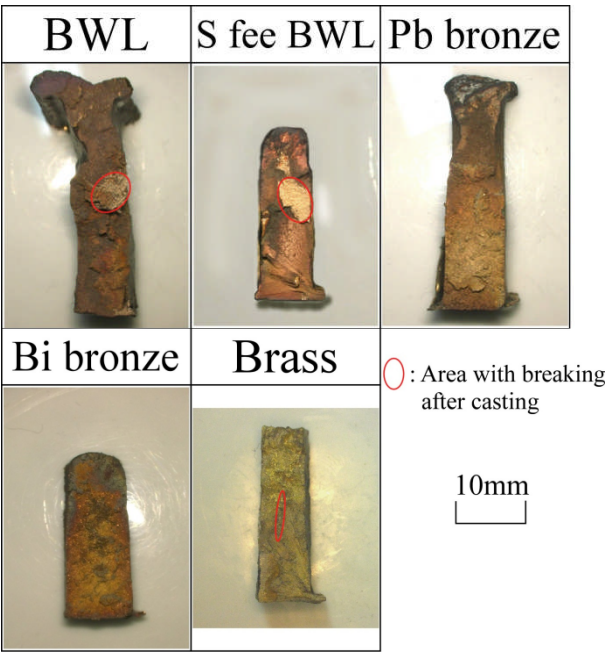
The appearances of the fracture of various Cu alloy castings on the permanent mold with 200mm of the distance between flanges.
